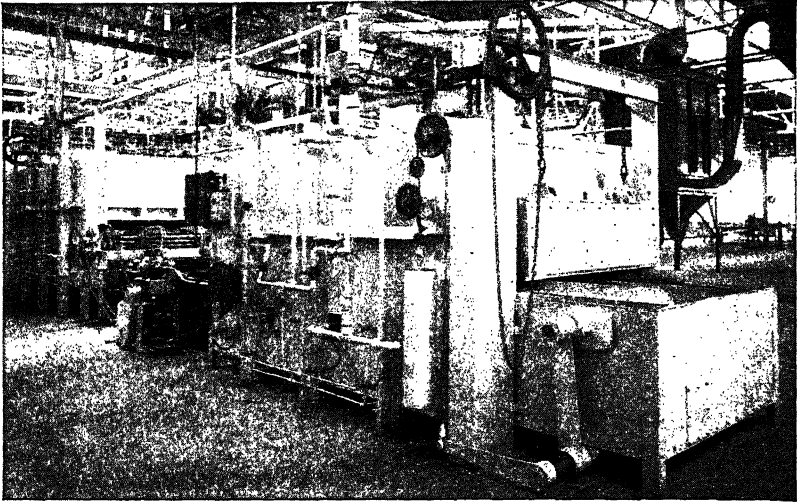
Furnace installation for heat treatment of automobile drive shafts. Lugs on chains in quenching tank move shafts forward at the desired speed while second chain rotates them at 150 rpm while quenching.
